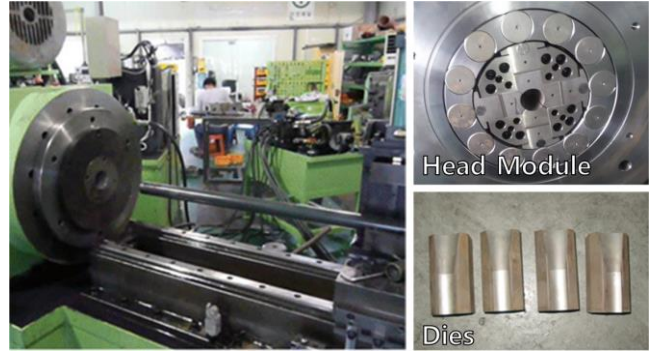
The head module and dies of the rotary swaging machine for manufacturing prototypes
